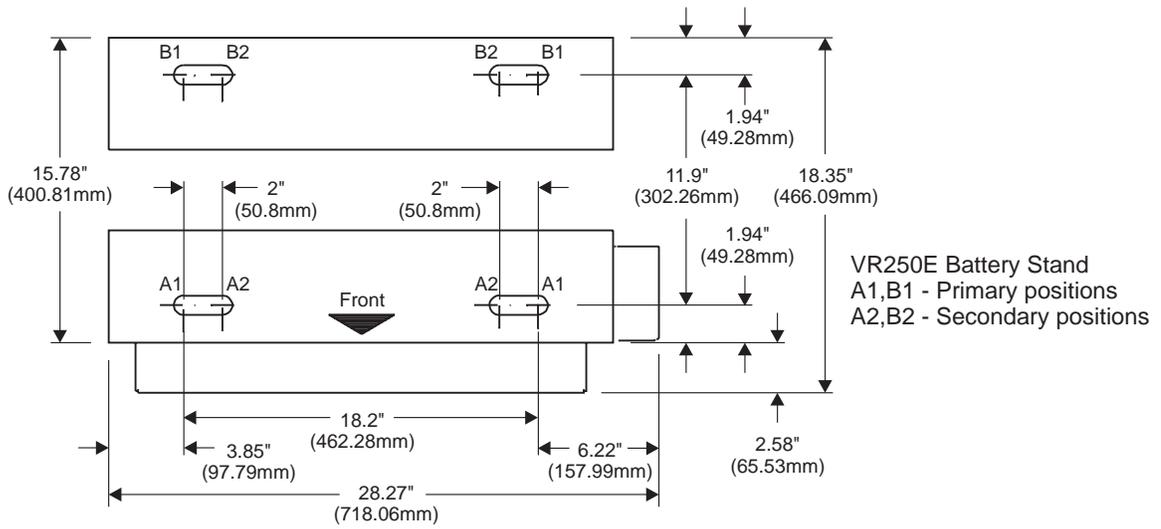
C: VR250E Battery Stand Mounting Footprint
